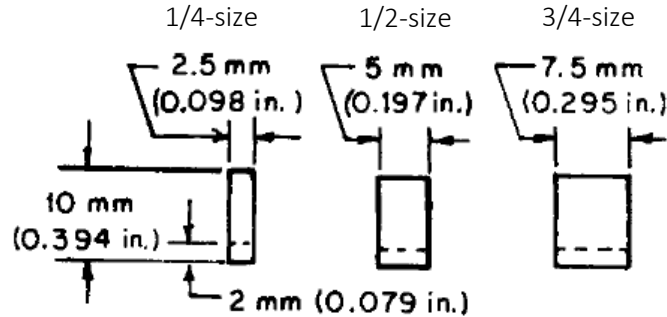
Cross-sectional dimensions of the SCVN specimens used in this study.
